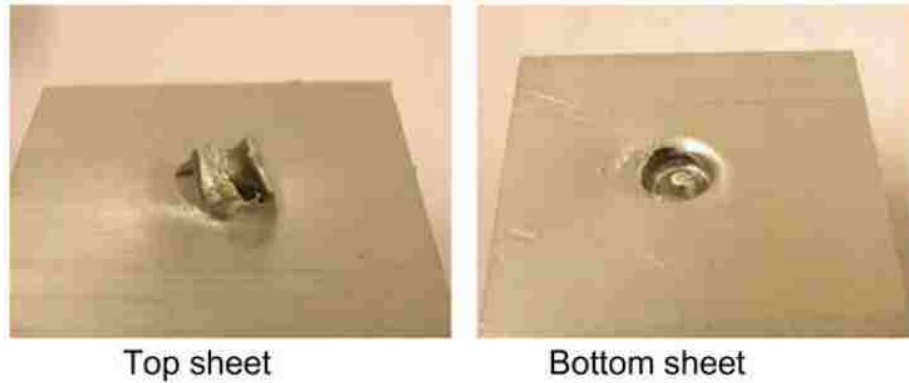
Typical Failure mode of SPR lap joint: partial tilting and rivet tail pull-out can be observed [29]
